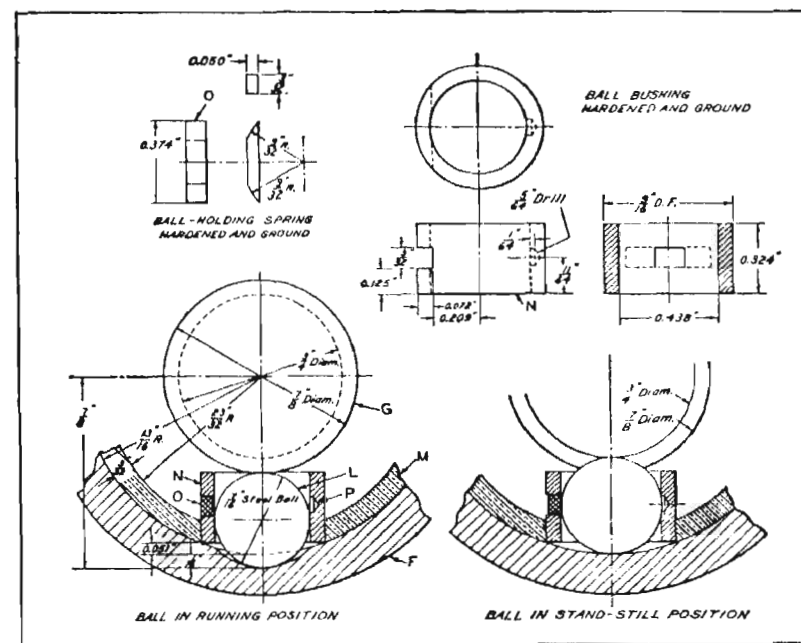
Enlarged Scale Views of Details N and O in Fig. 11 and Broken Section Views Showing Spindle Clutch Balls L in Running and Idle Positions.
